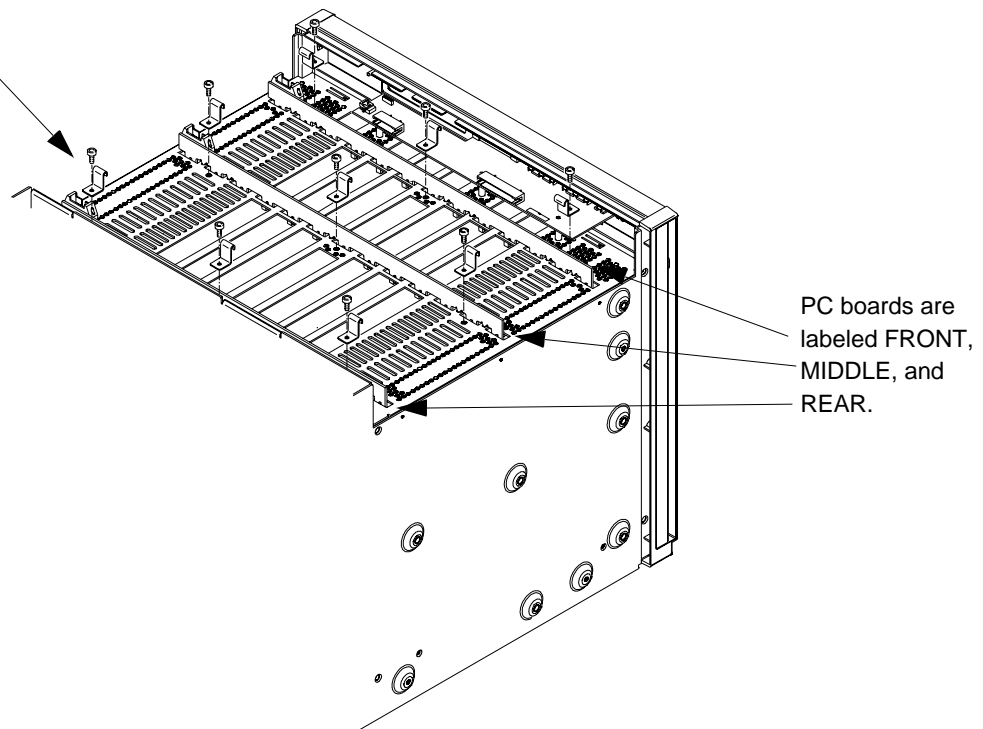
Removing / Replacing the Enhanced Monitor PC Boards
